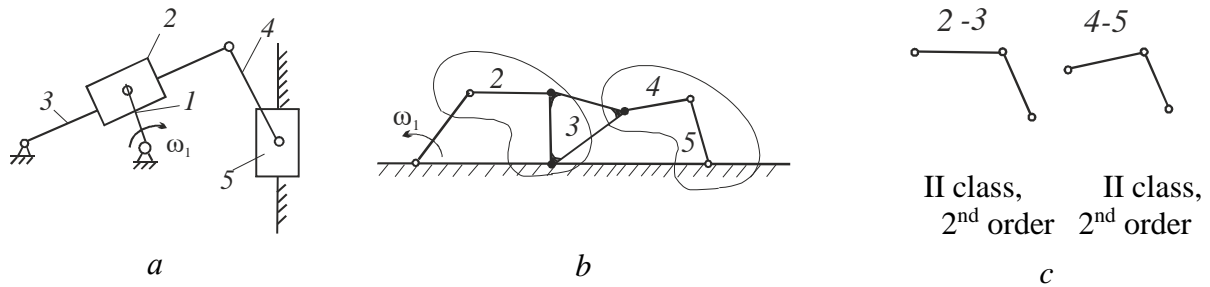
Briquetting machine mechanism (rocker six-links mechanism):
